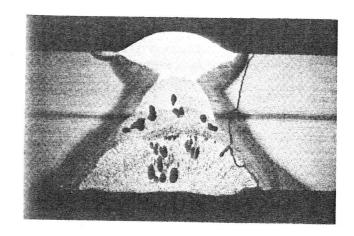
Fatigue cracking at a defective butt welded joint. (Photograph courtesy of Welding Institute, UK.)
